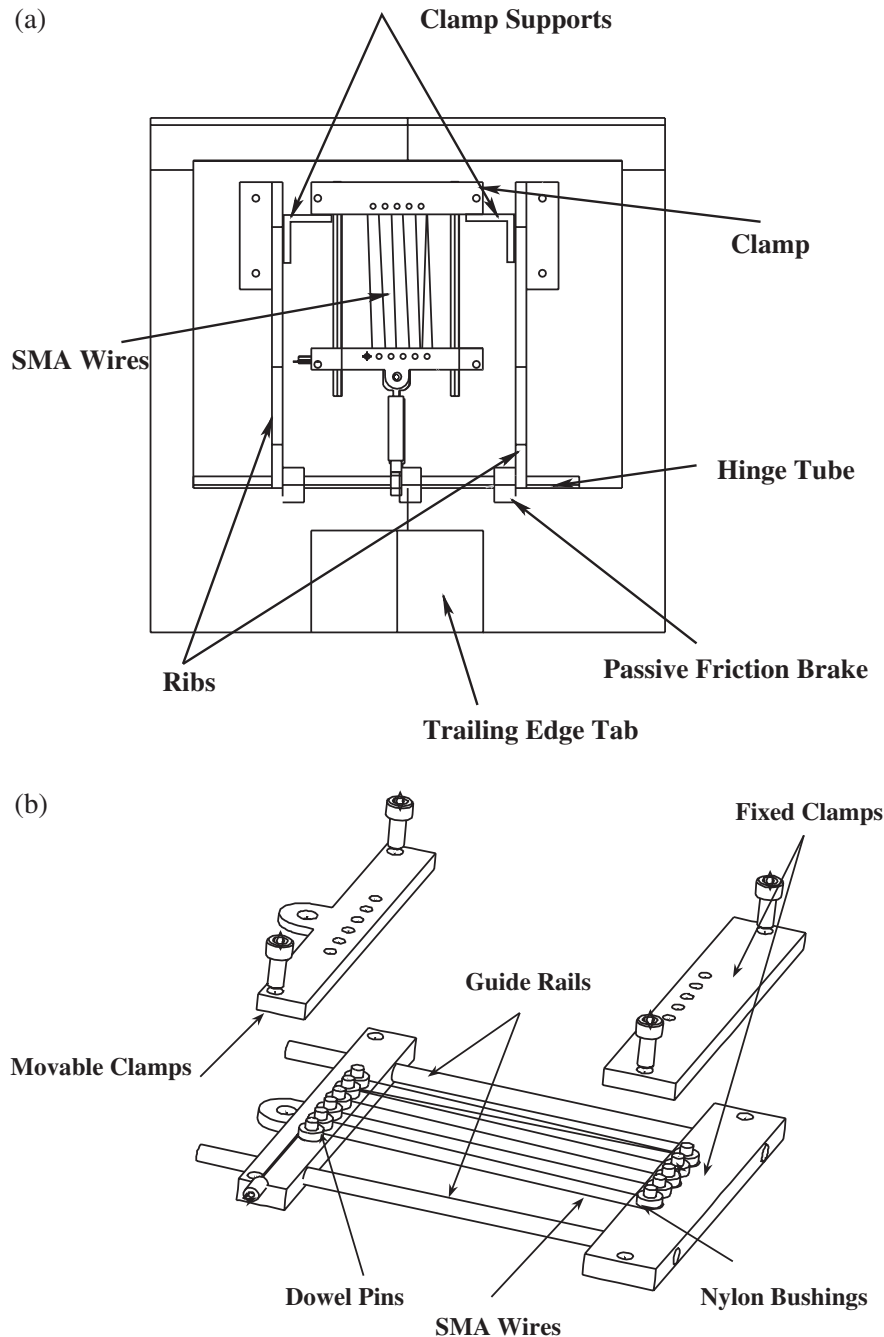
SMA actuator components: (a) Top view of actual assembly; (b) SMA actuator clamping details.
